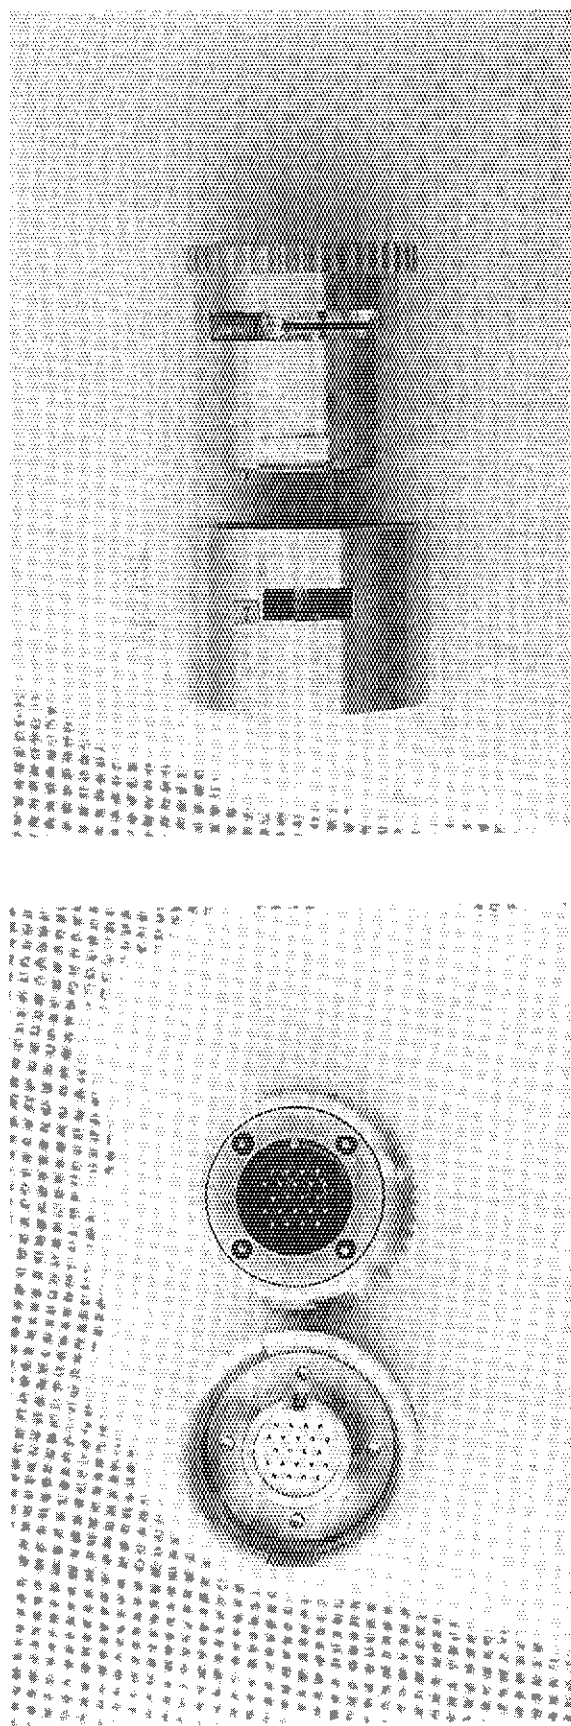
Fabricated receptacle and plug of 3rd step connector
